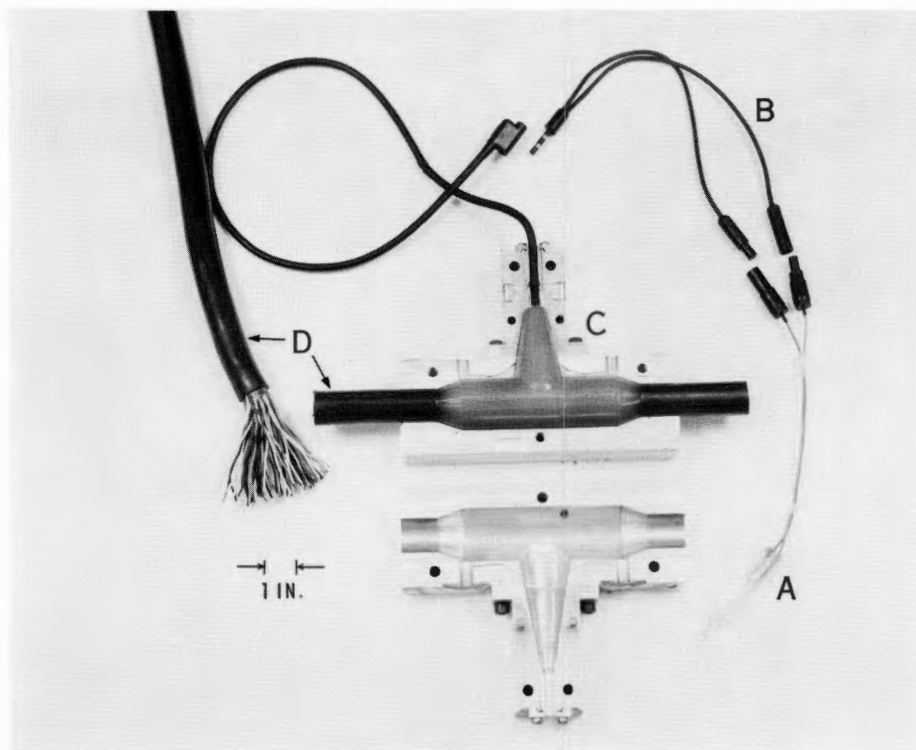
Connectors for horizontal temperature array. (A) Encapsulated thermistor; (B) 35-foot leads; (C) mould; (D) trunk cable.
